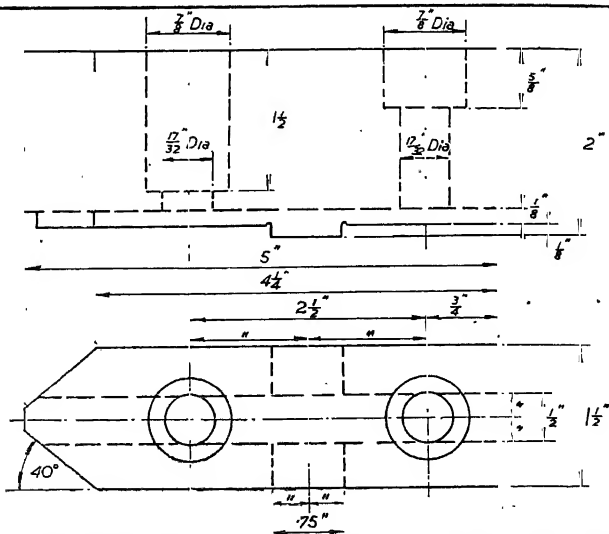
Soft jaw blanks for Union 3-jaw chuck (with replaceable jaws). 12 in.
